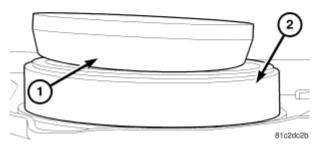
Tapered End & Rear Crankshaft Oil Seal Assembly Courtesy of CHRYSLER LLC
